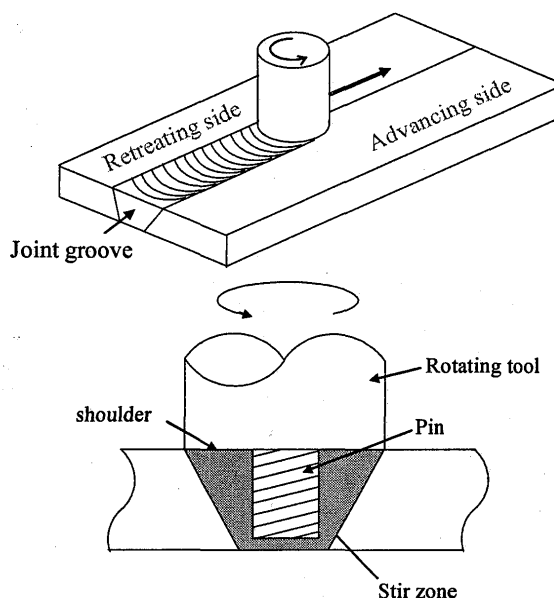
Schematic illustrations of friction stir welding process.
